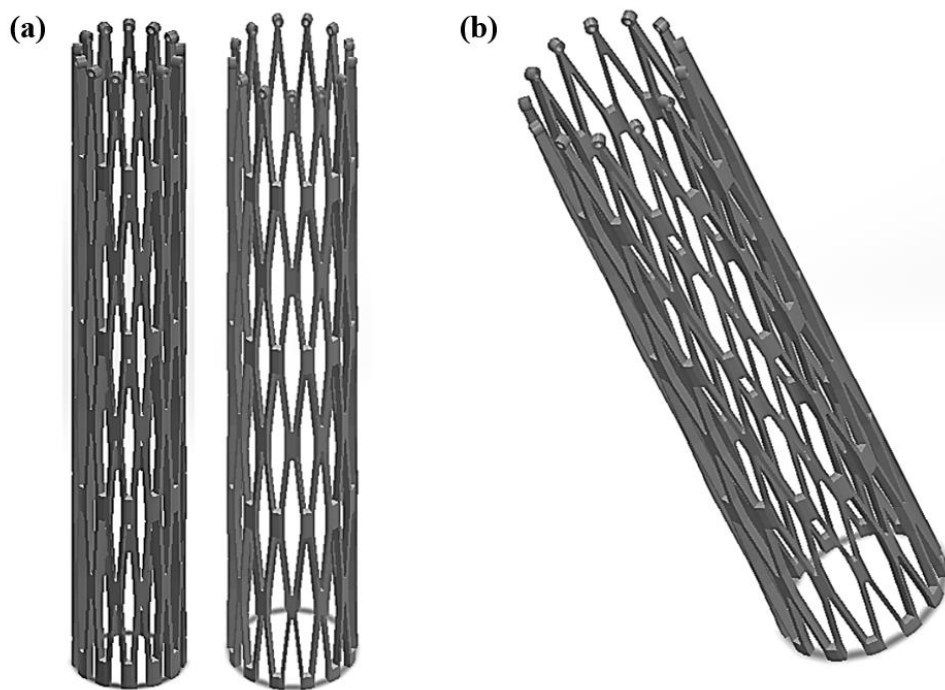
(a) 3-D CAD model of a laser cut stent (left), expanded stent (right) (b) 3-D wrapped geometry showing the intricate design for the MMM stent
